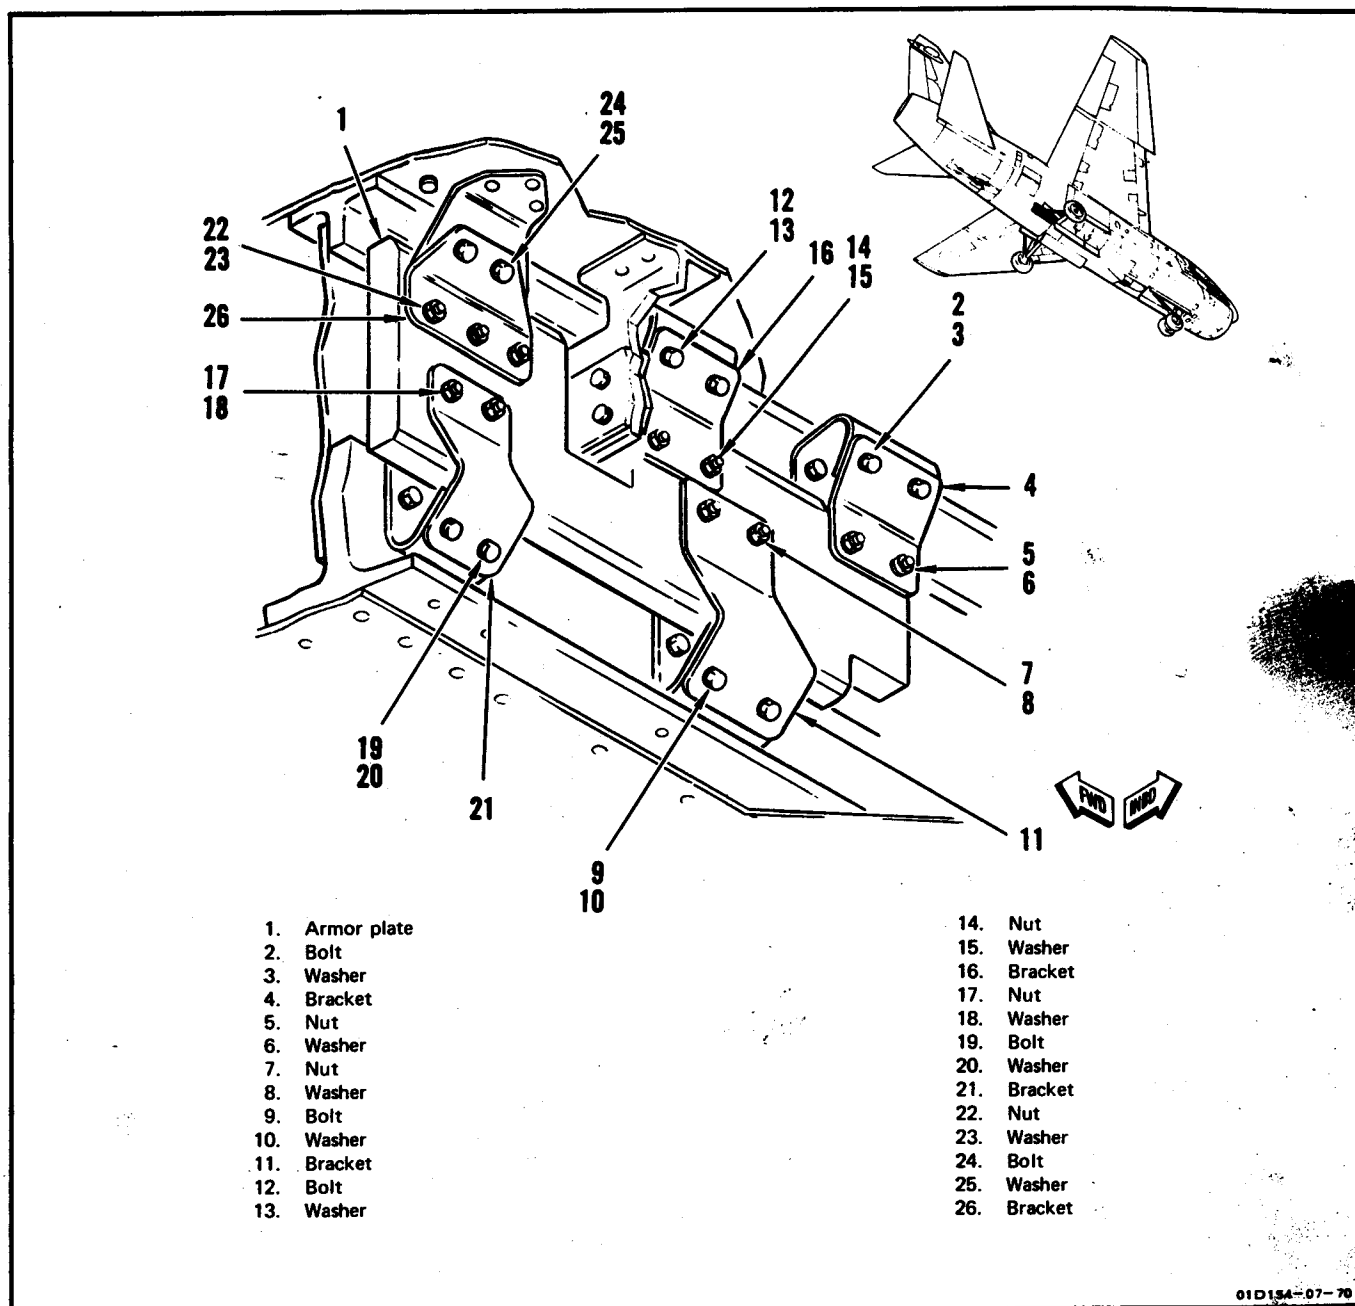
Fuel System Right Side Armor Plate Removal and Installation
